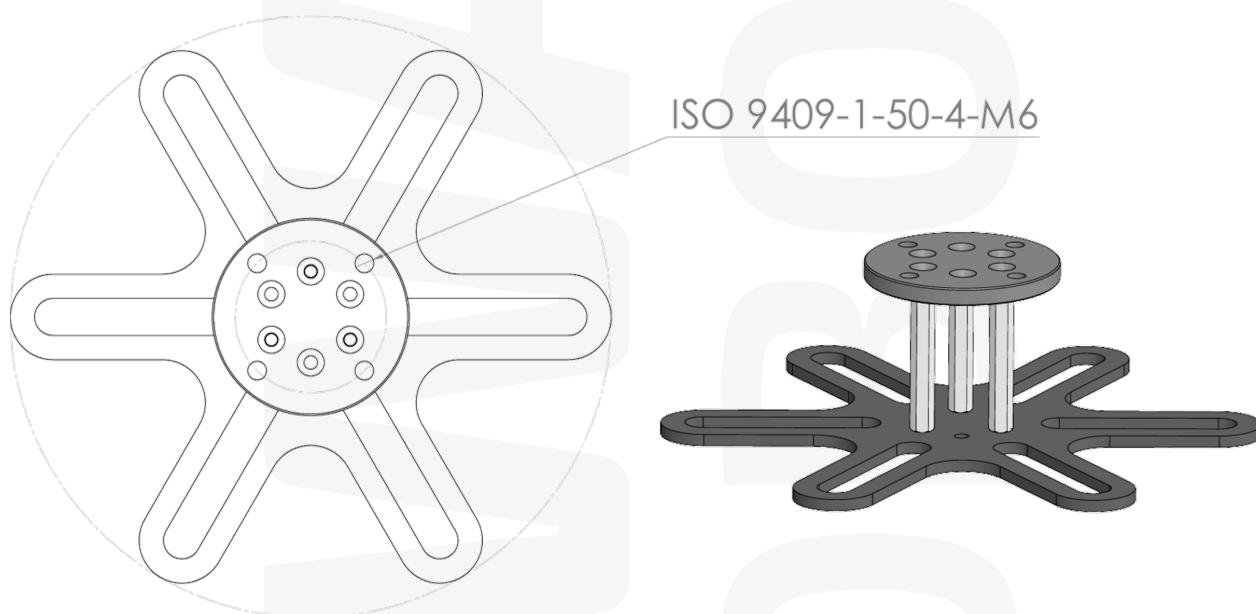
Universal Mounting Adapter (All dimensions in mm)
